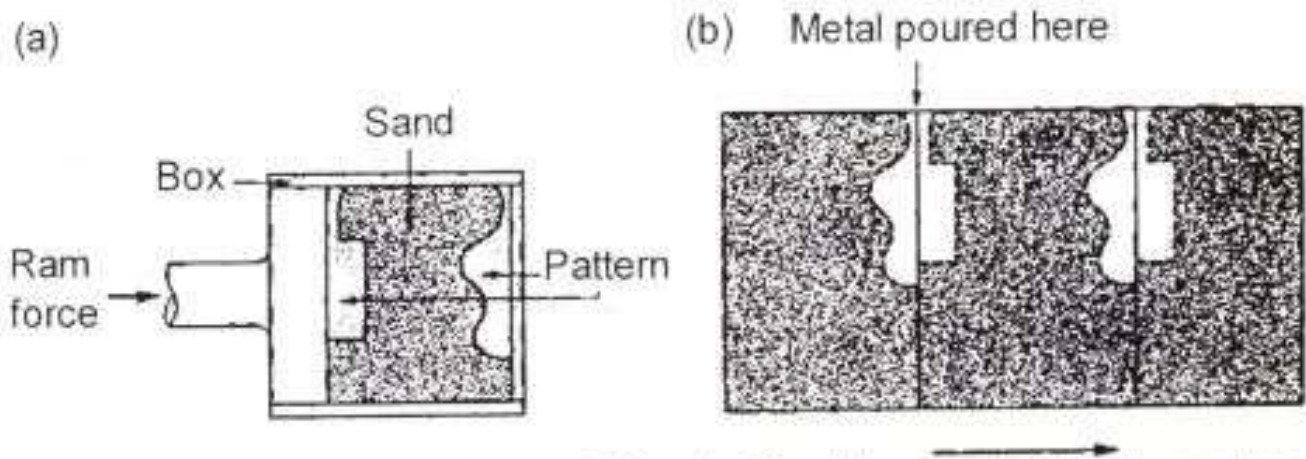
Vertical flaskless molding. (a) Sand is squeezed between two halves of the pattern. (b) Assembled molds pass along an assembly line for pouring
